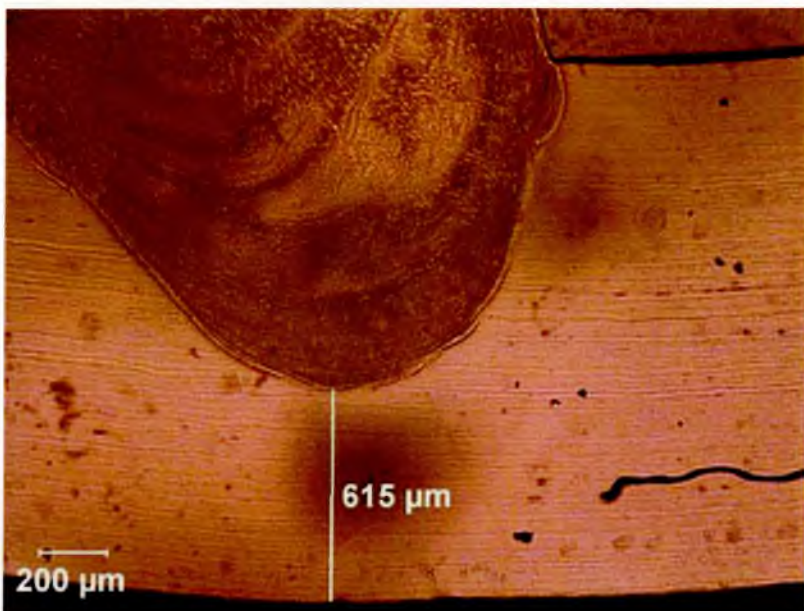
Depth of penetration for laser hybrid welded lap joint for Hy-Tens 1000 to zinc coated mild steel
